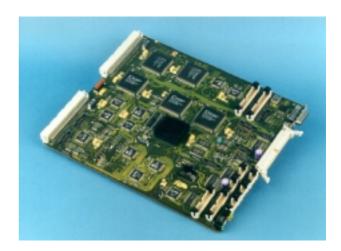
Cell Processor Assembly (Printed Circuit Board )
